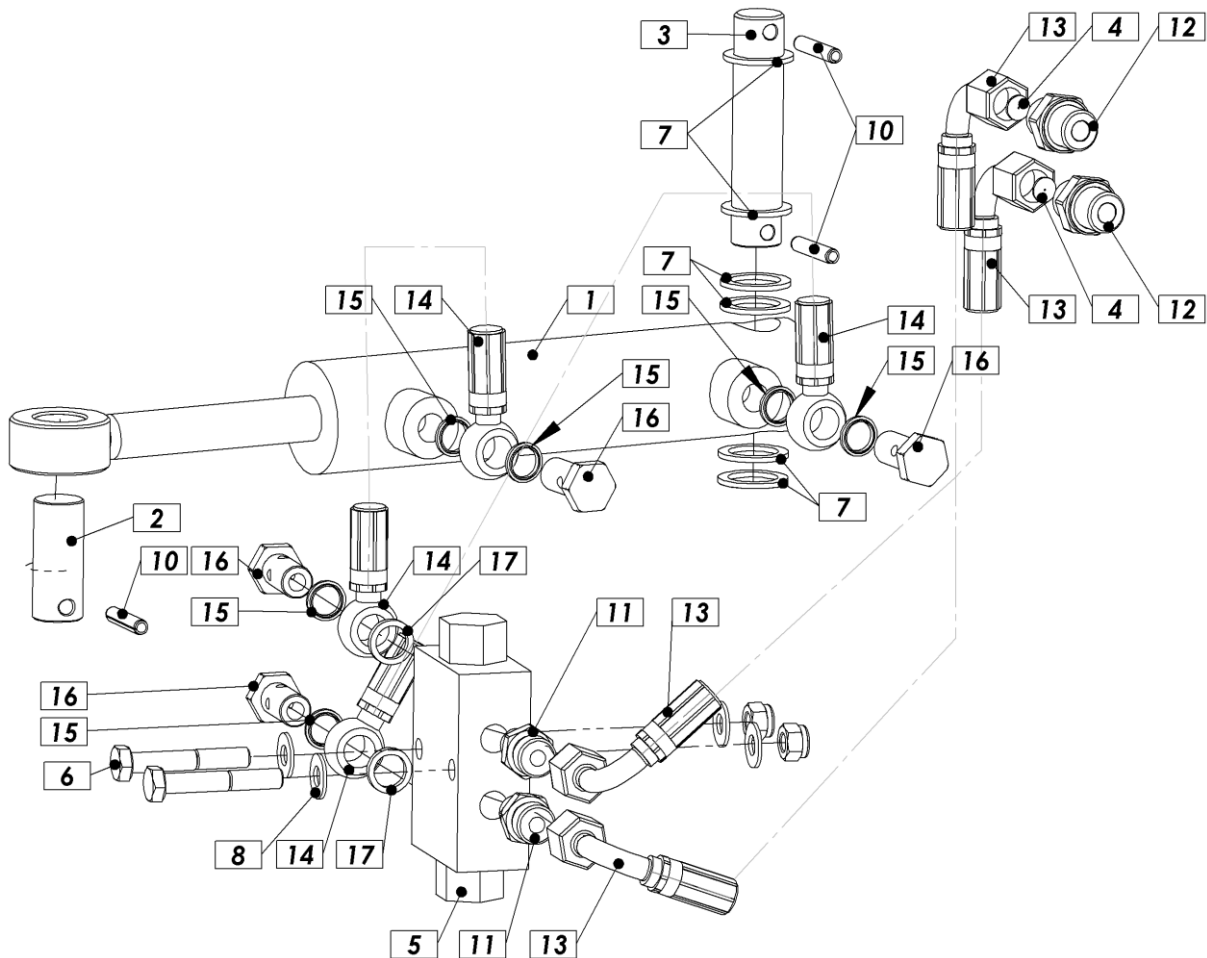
900.05.75.A – Hydraulic conveyor belt offset
